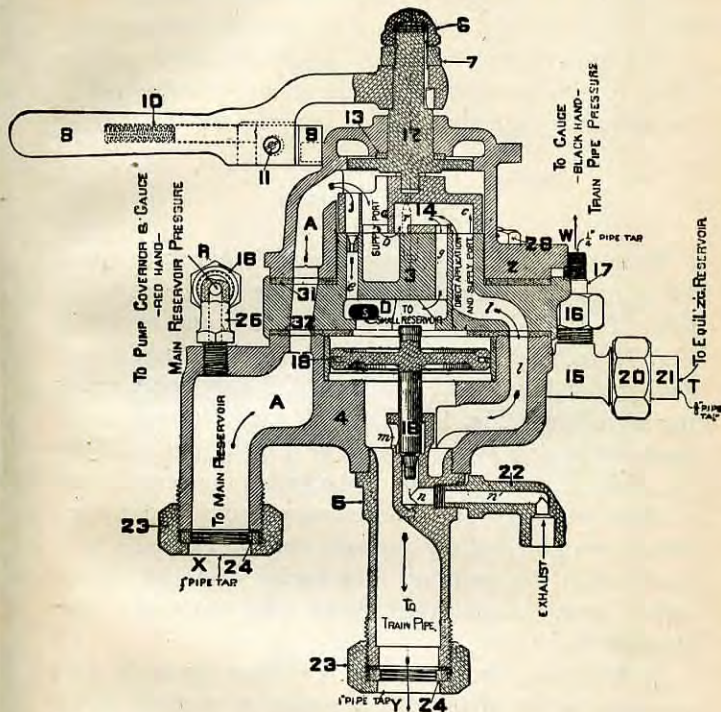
G-6 Engineer's Brake Valve. Release Position. Front View.
